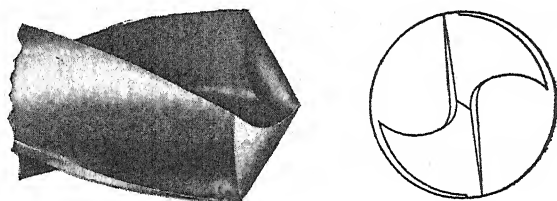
Side and End View of a Thick Webbed Drill Which Has Been Thinned.
